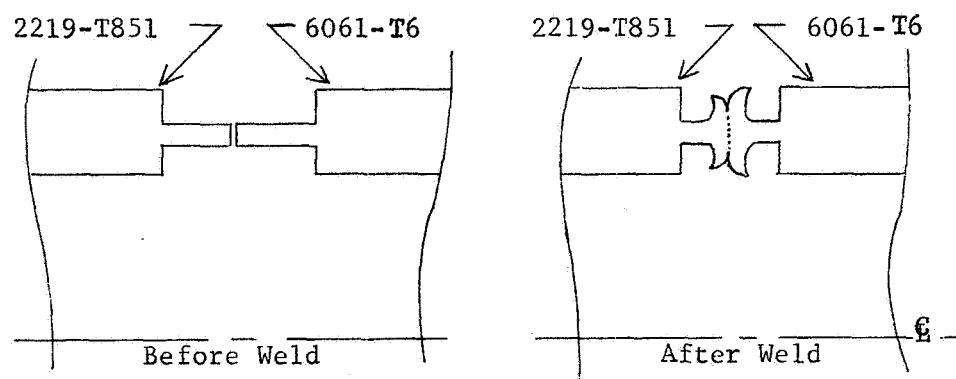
Inertia Welding 2219 to 6061 Aluminum for Production
